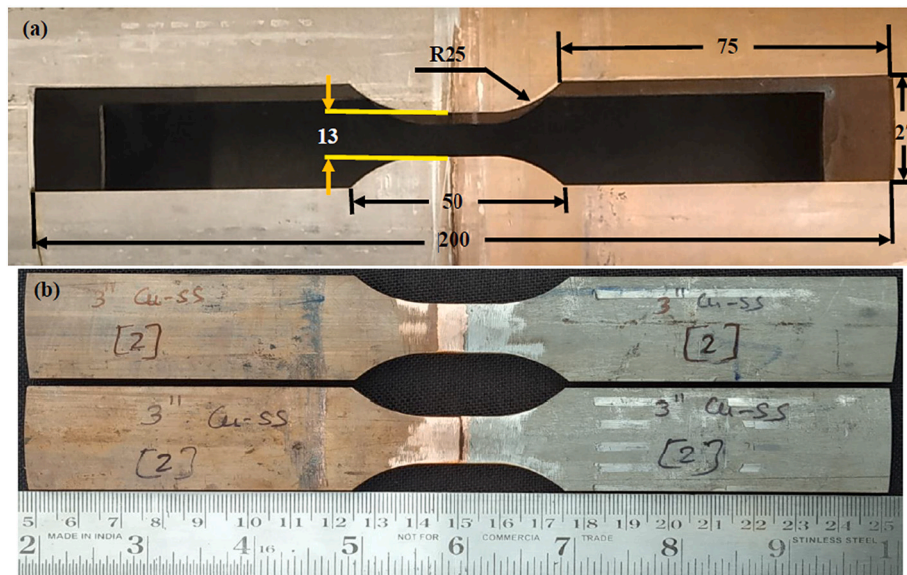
Tensile specimens extracted from welds, (a) dimensions according to standards of ASME sec IX (all the dimensions are in mm), and (b) Extracted sample piece.
